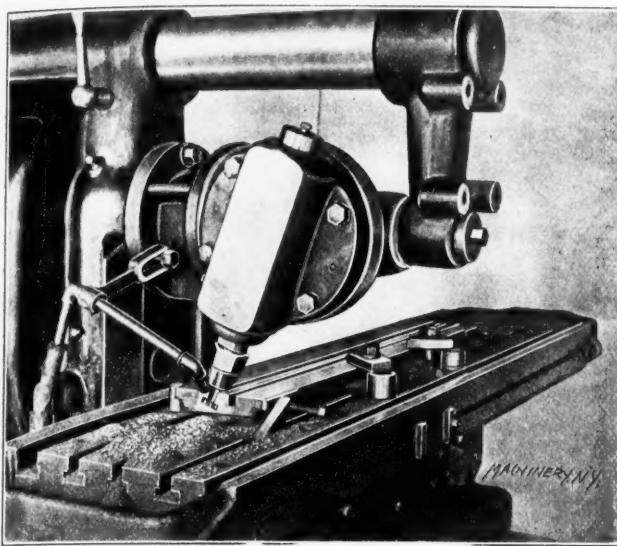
The Universal Milling Attachment cutting an Inclined Slot.
